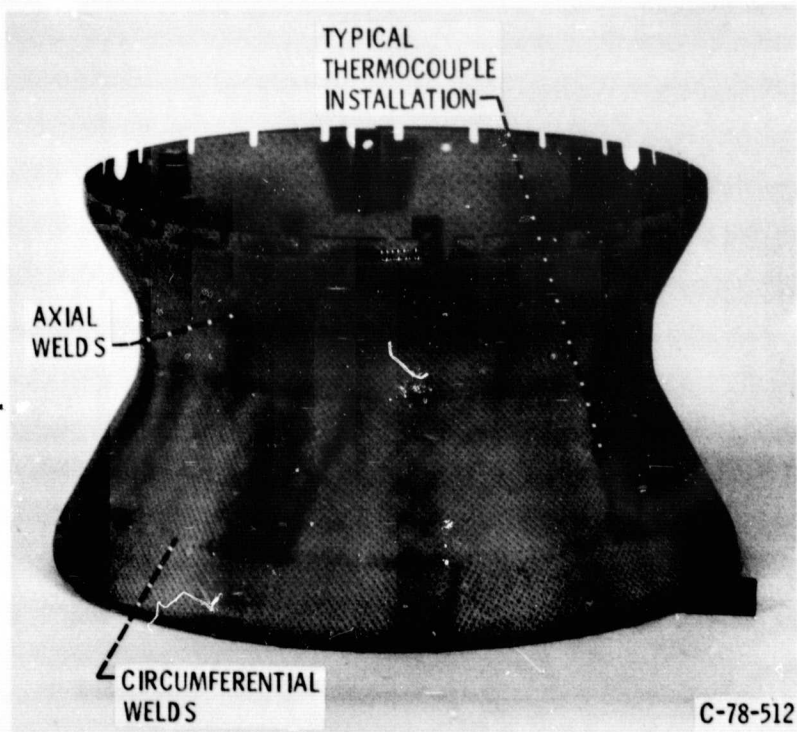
Axial position of thermocouples installed on Lamilloy liner.
